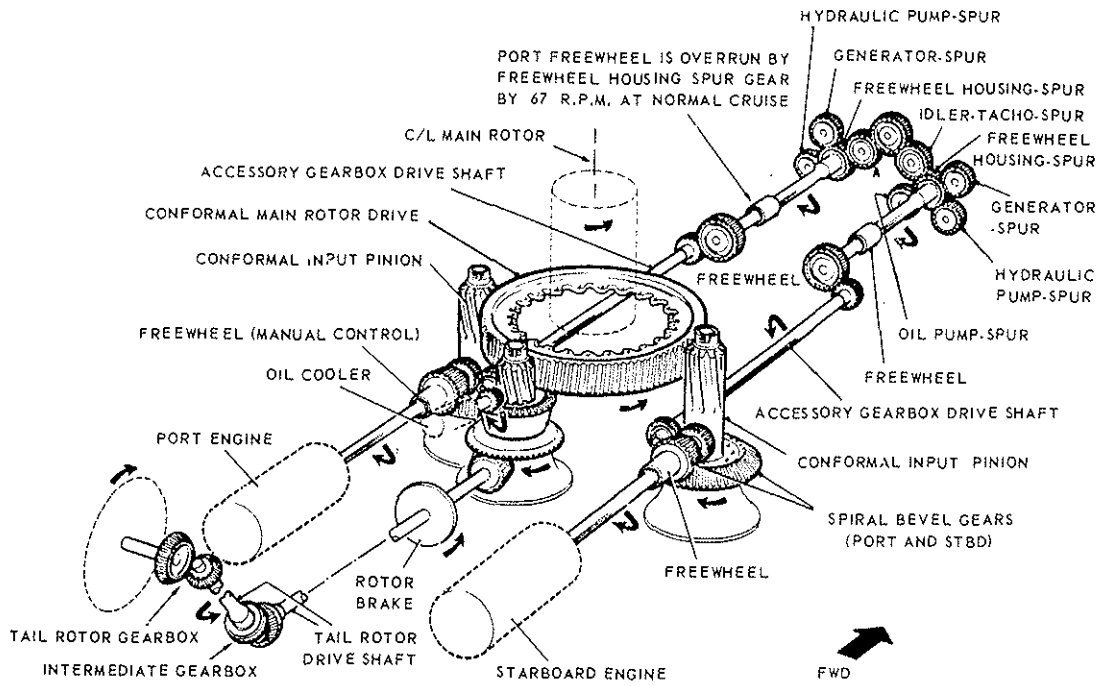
LYNX MAIN GEARBOX GEAR ARRANGEMENT
